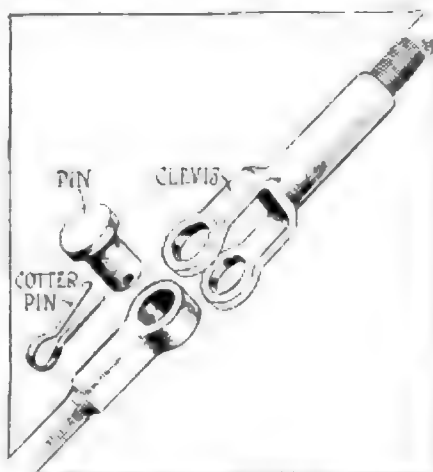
This is the way to take that yoke apart when you start to adjust the brake rods
